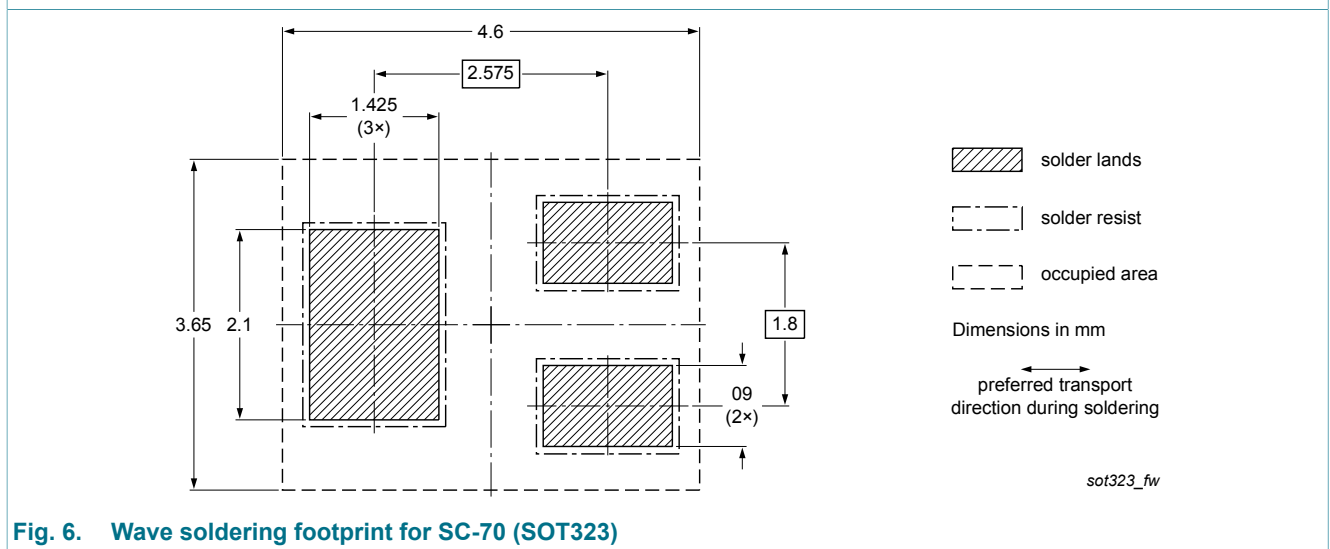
Wave soldering footprint for SC-70 (SOT323)
